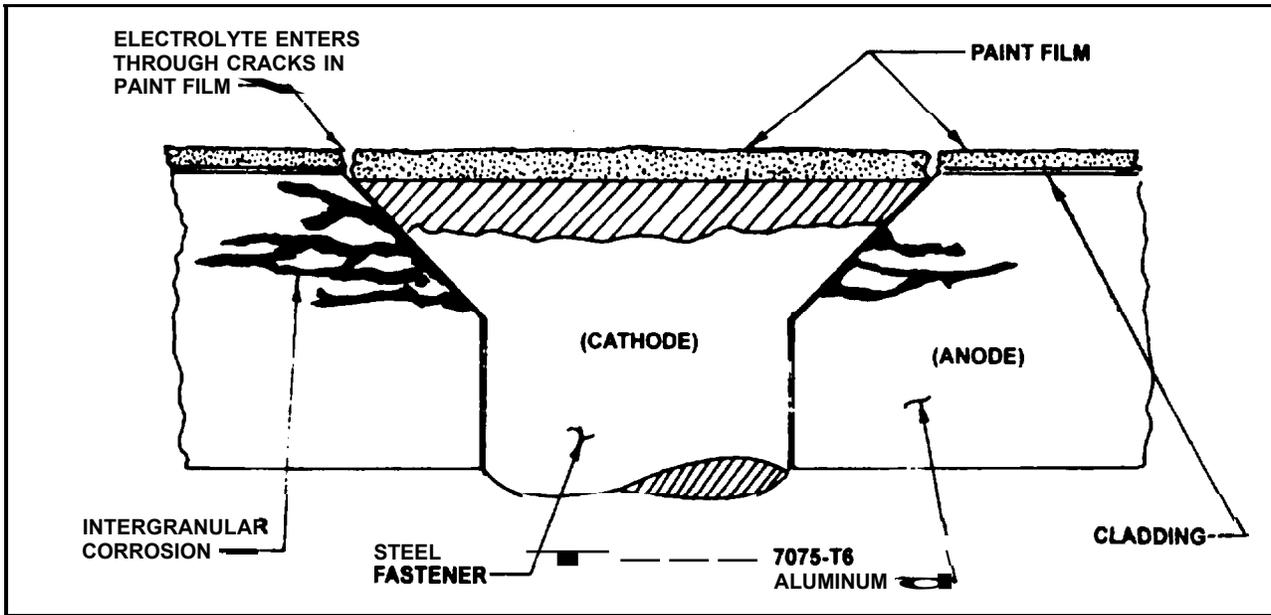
Inter-granular Corrosion of 7075-T6 aluminum adjacent to steel fastener.
